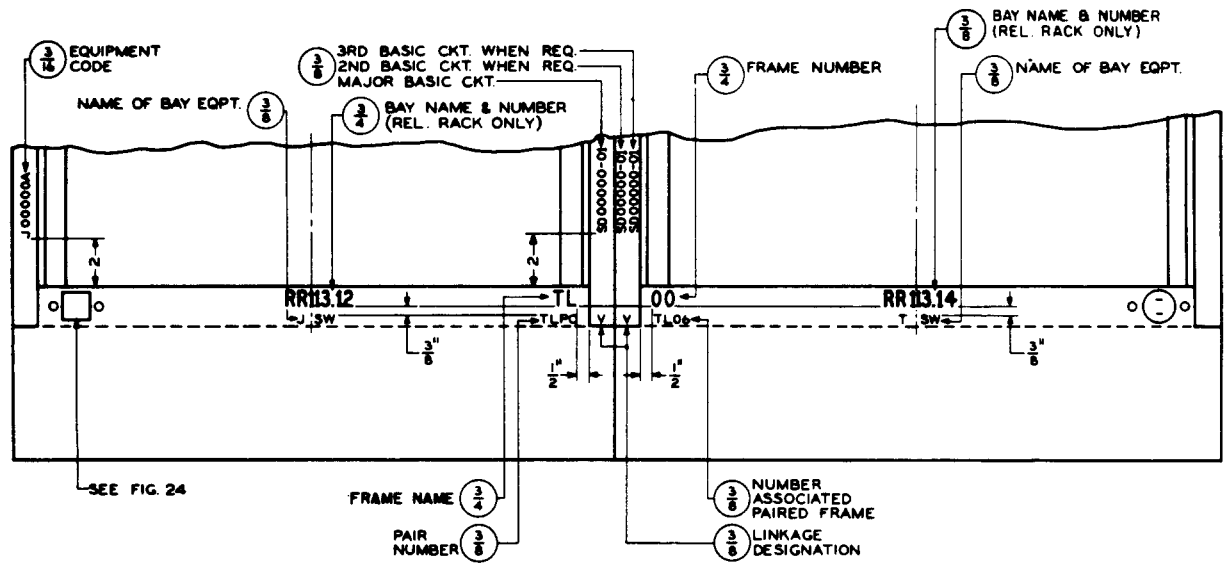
Front View of Double-bay, Box-type Frame Base
